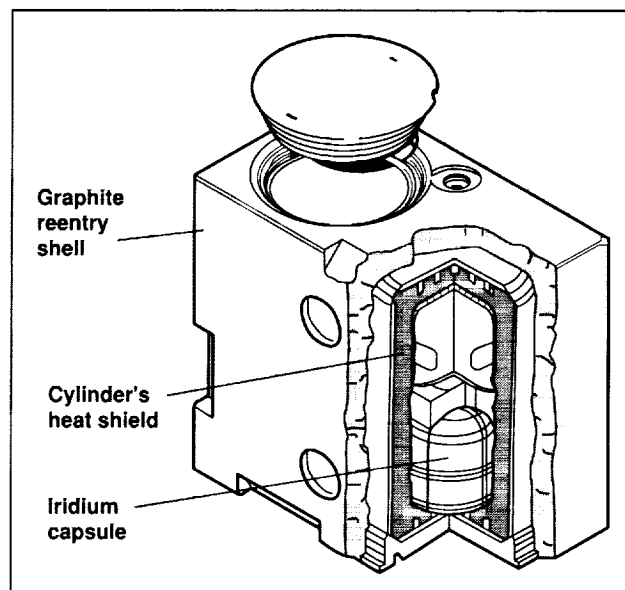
Cutaway view of general-purpose heat source (GPHS) brick.
